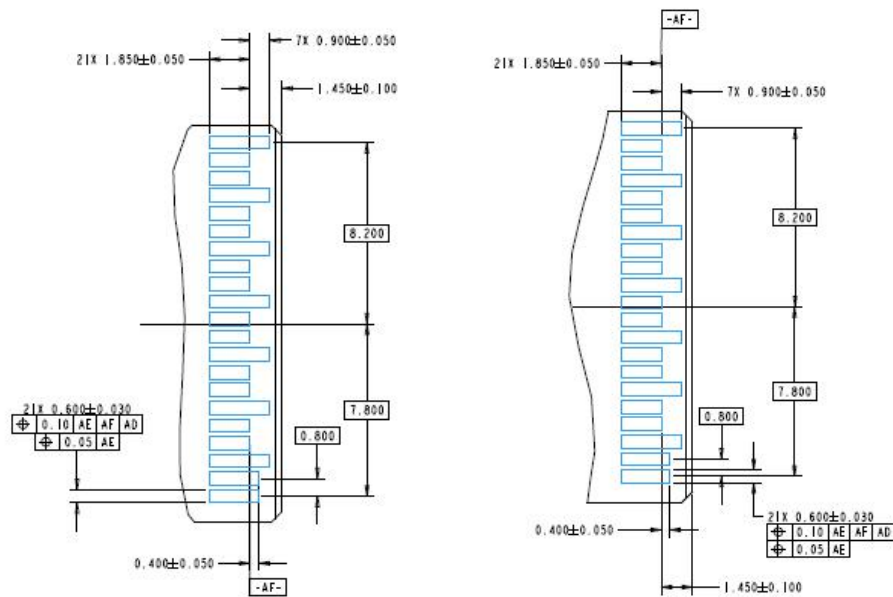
PCB Contacts (left: bottom PCB, right: top PCB)
